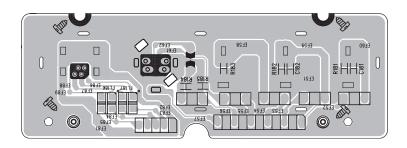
EU55 Front (Jack) PC Board (Bottom side)
